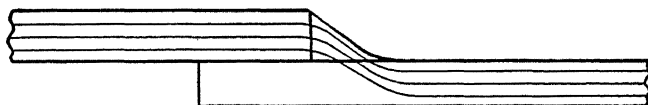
Example of lap weld in which there is a fairly uniform transfer of stress through the weld.
